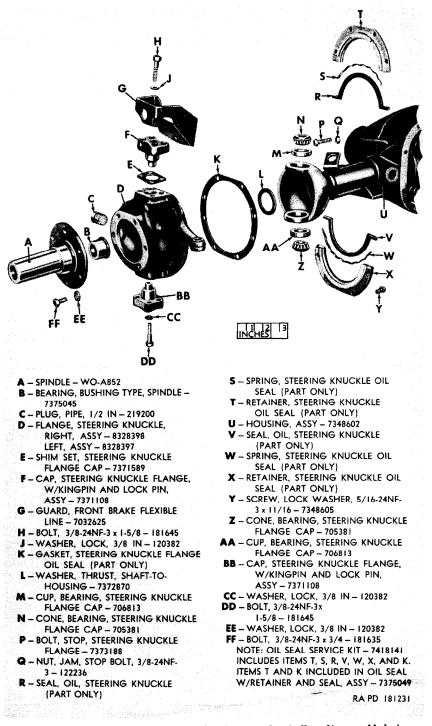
Front axle steering knuckle flange and spindle-disassembled view.
